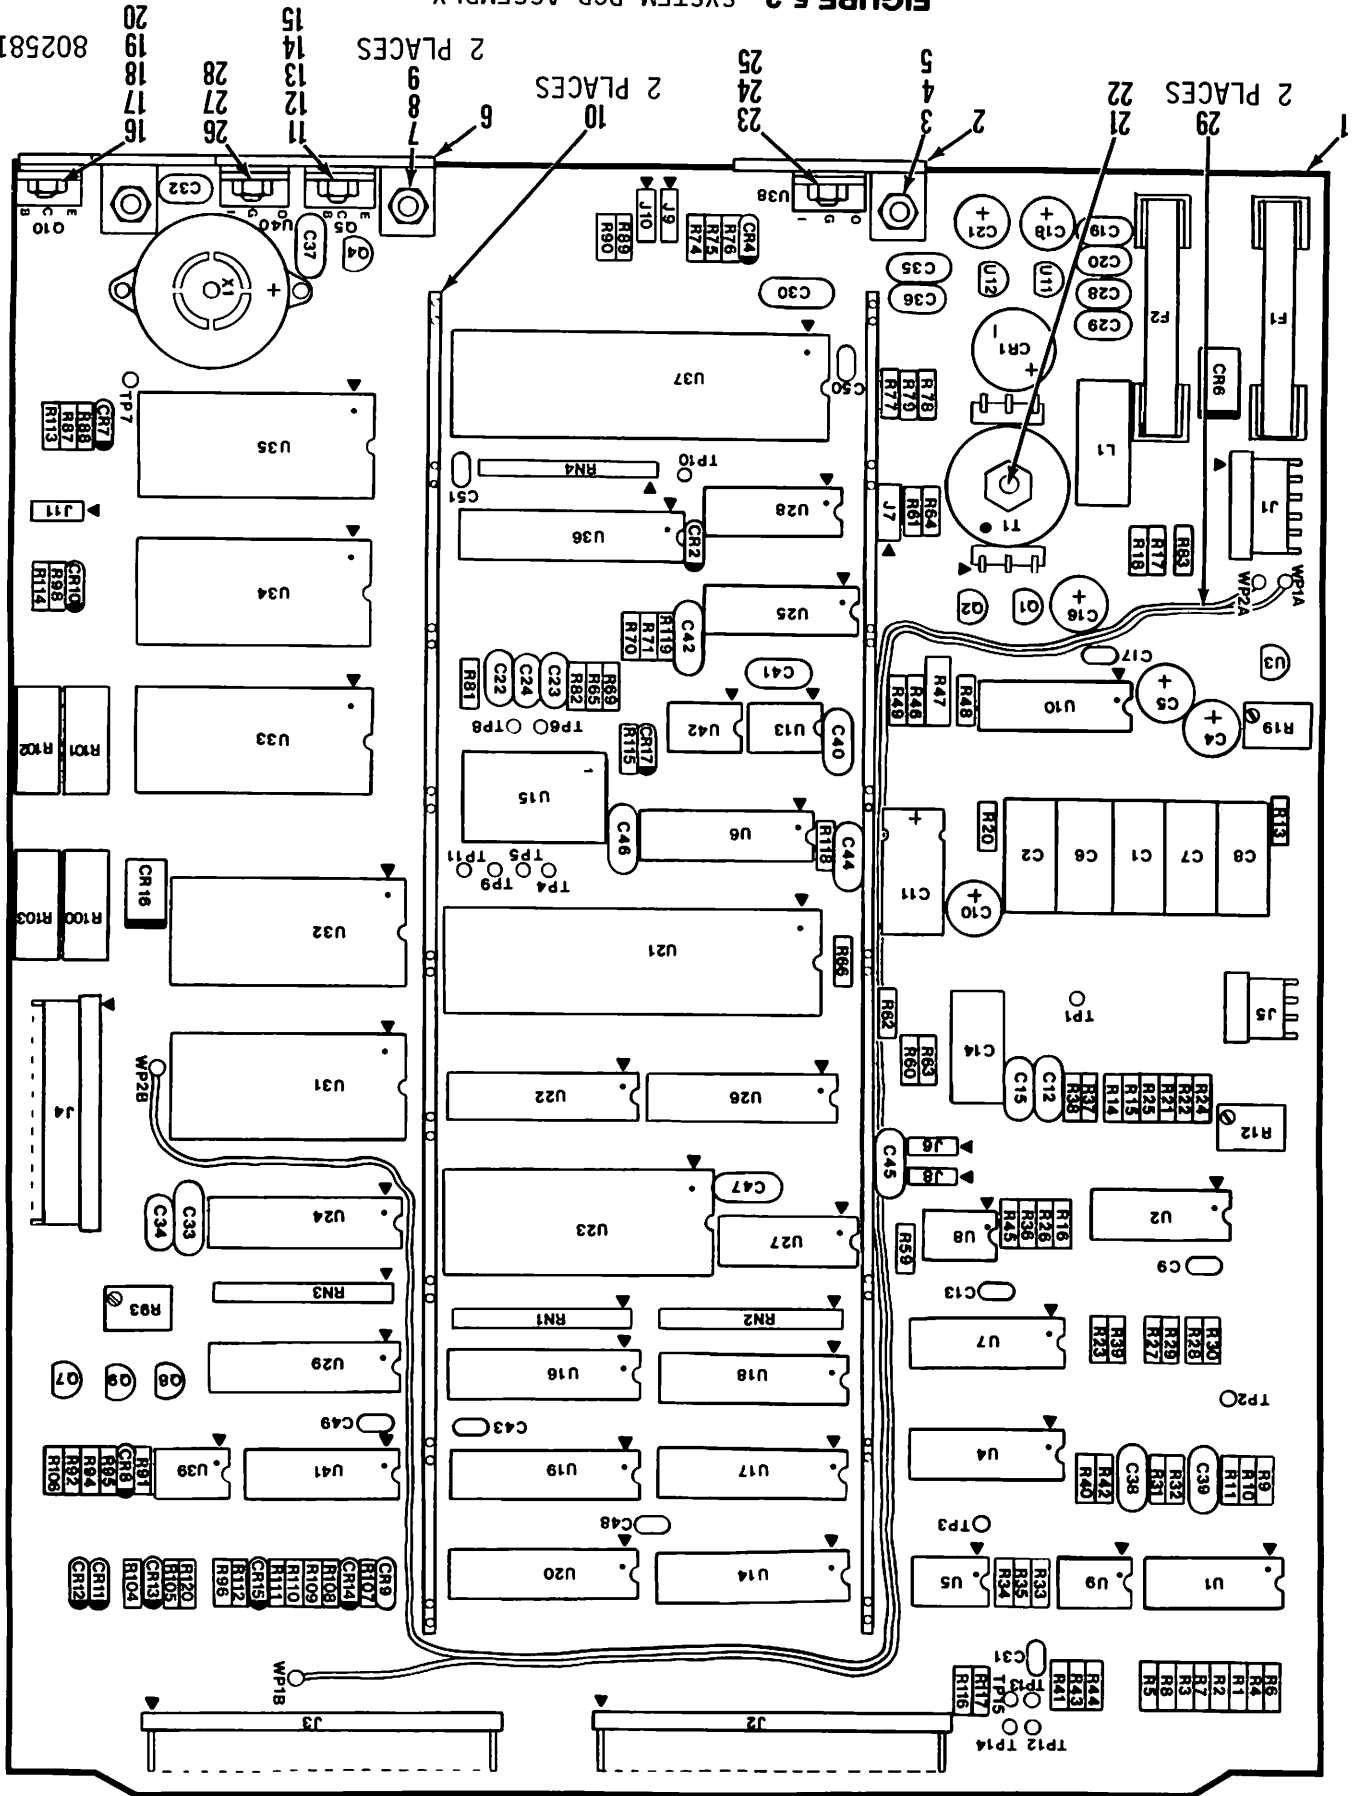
SYSTEM PCB ASSEMBLY
